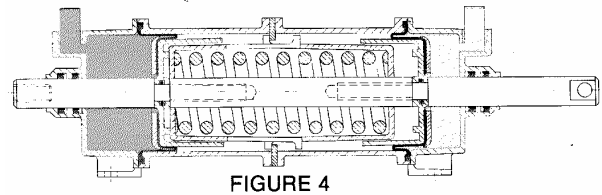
shows the cylinder with air pressure accumulated at the left hand side behind the diaphragm and piston assembly. This causes the piston rod to move to the right. The spring is retained by a spring housing which is caged behind a center ring. Again a rolling diaphragm and spring permits infinite positioning in both directions. In order to prevent premature damage to the diaphragm, it is recommended to maintain a 2-3 psi pressure at all times at both end of the cylinder.
